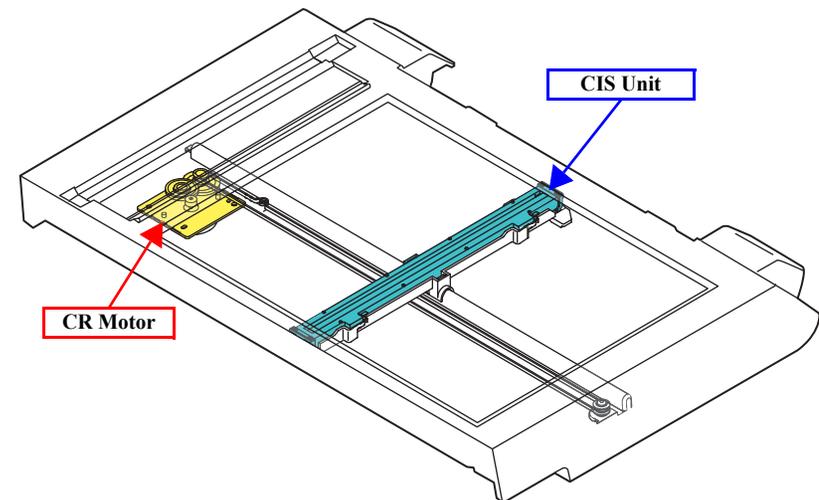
CIS Unit and CR Motor in Scanner Mechanism
